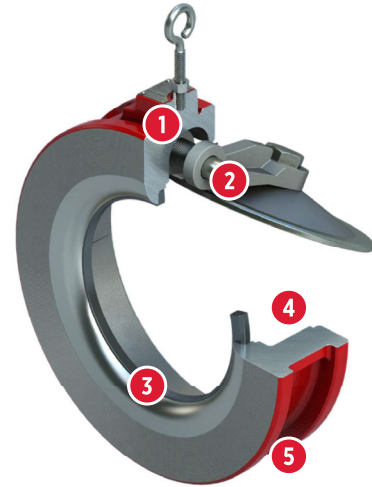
Seat Ring Hard Seat Cutaway Rear View.
